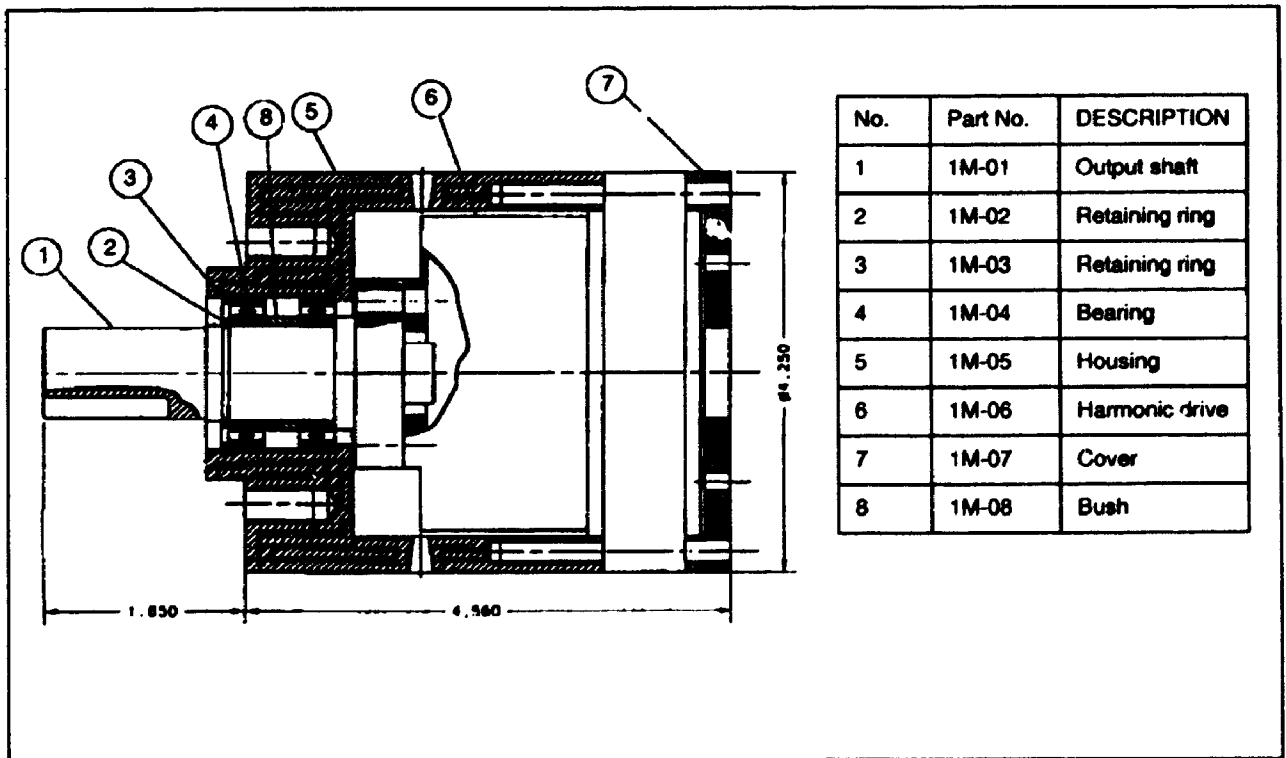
Construction drawing of the harmonic drive gearbox.
